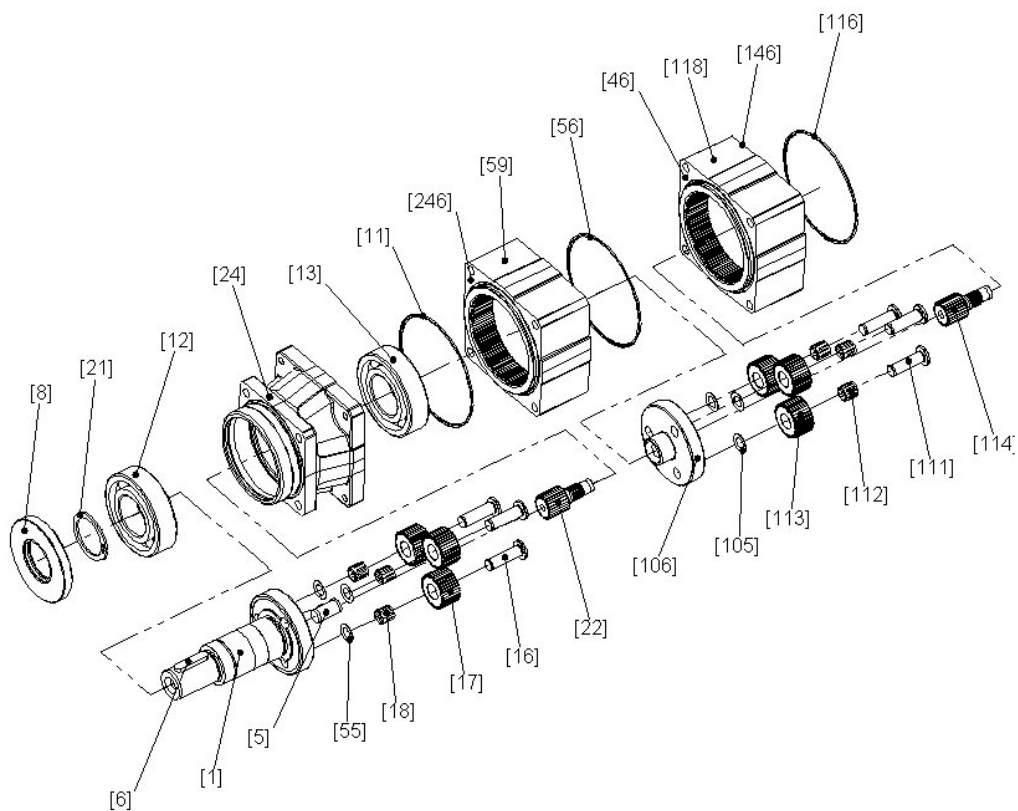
Basic design of a servo planetary gear unit PSKC122 to PSKC622
